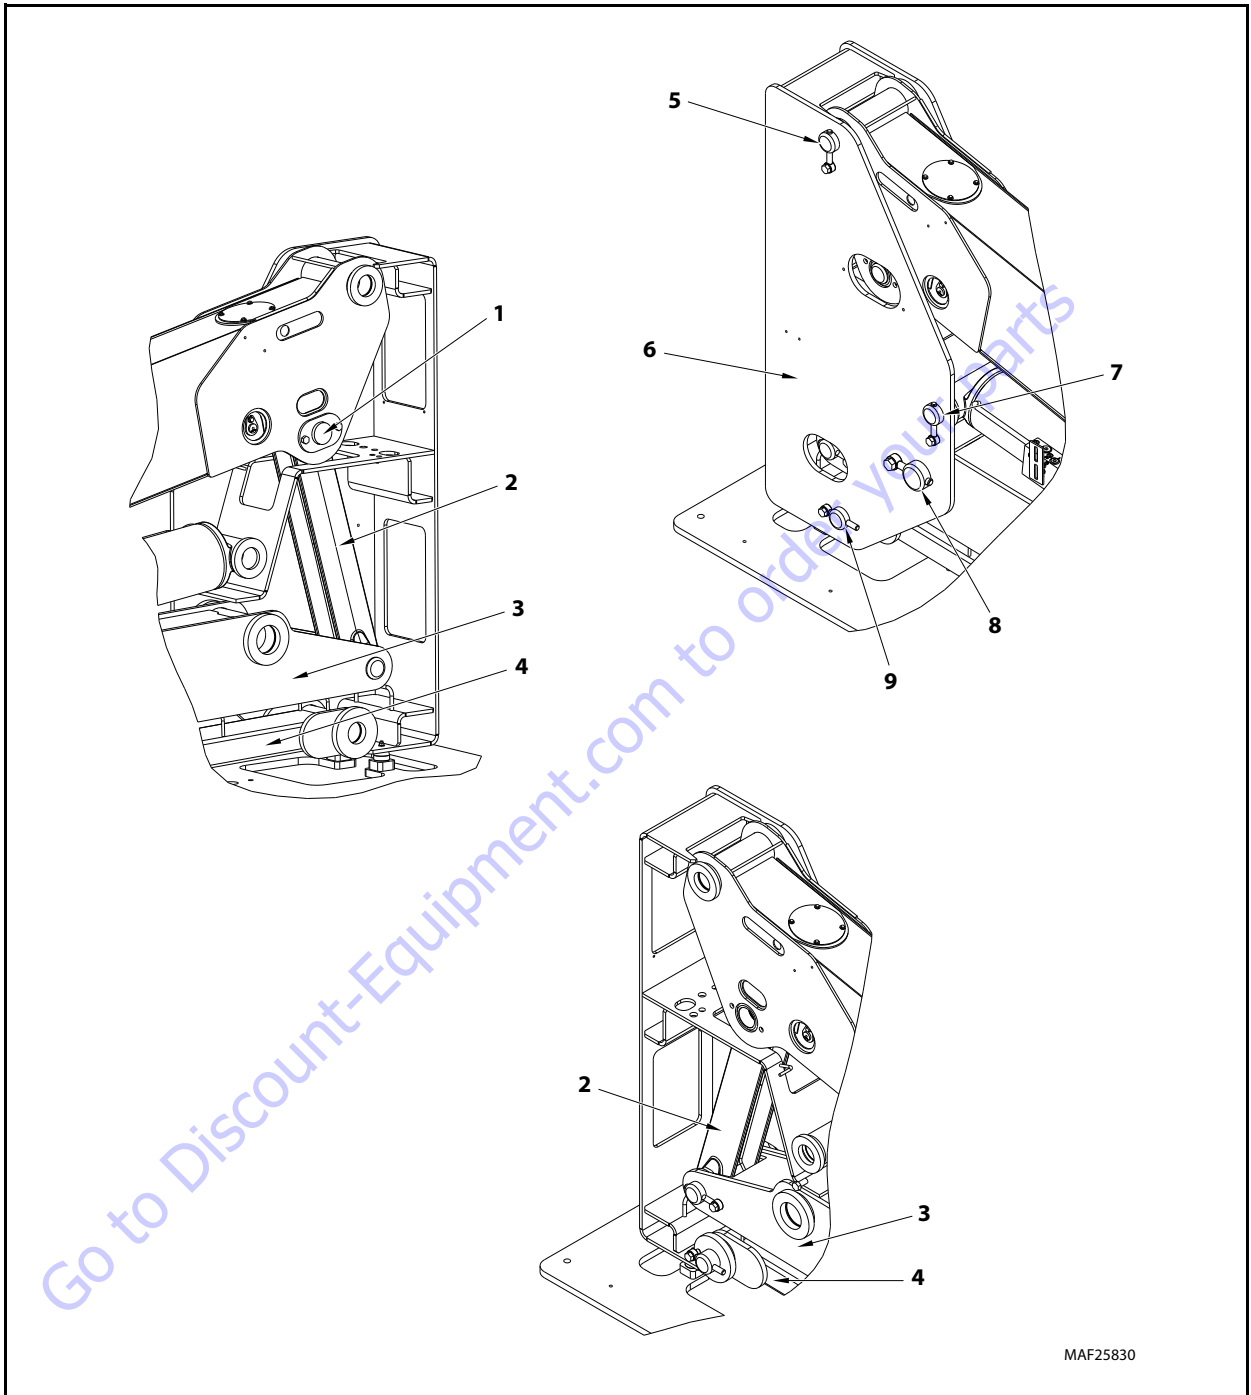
Boom Assembly Cutaway - Sheet 1 of 2
